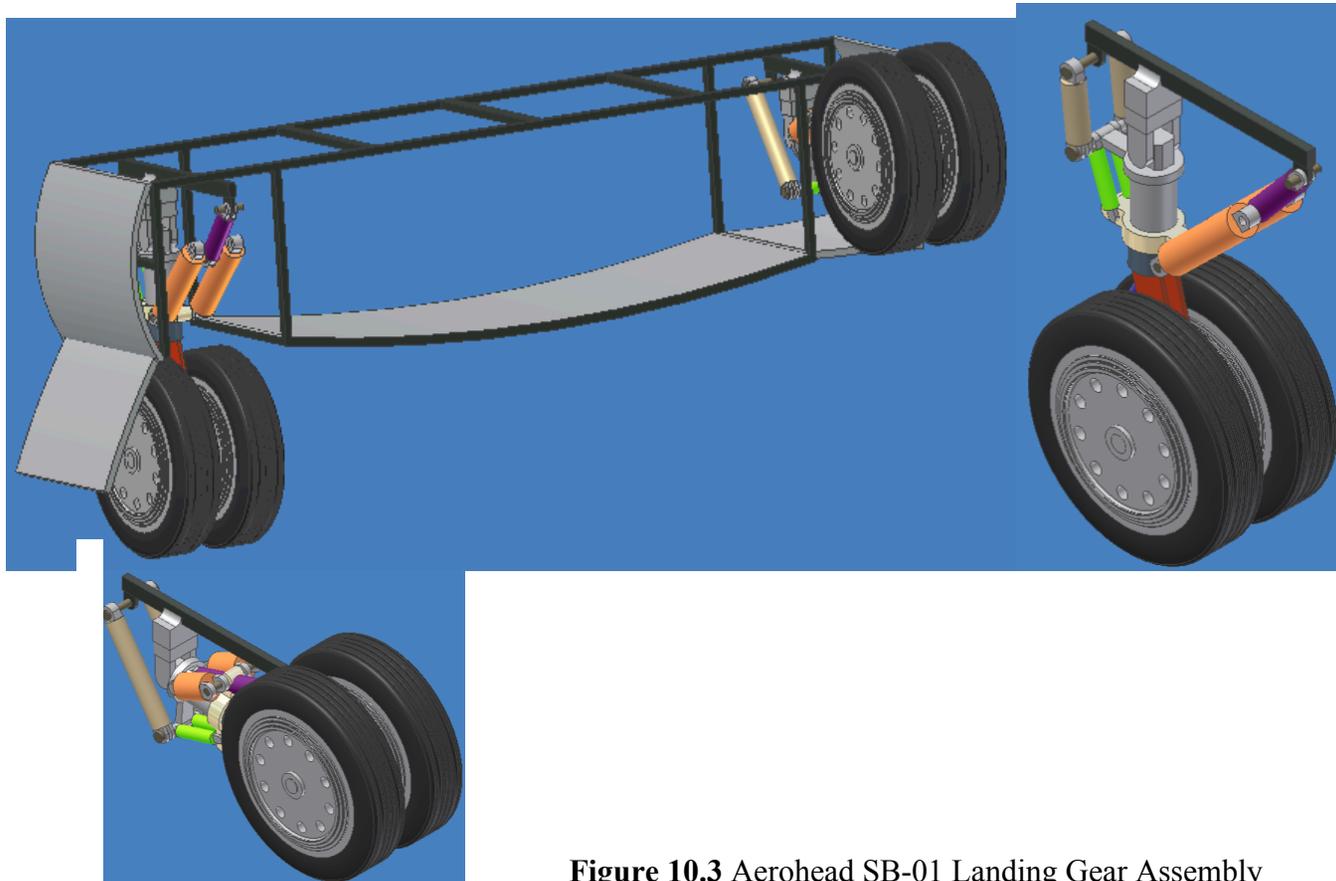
Aerohead SB-01 Landing Gear Assembly
